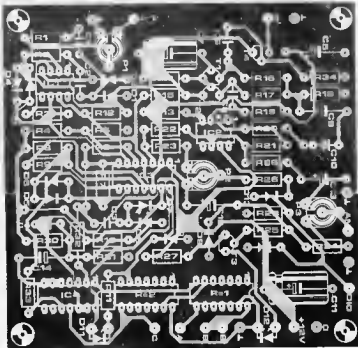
The printed-circuit board is double-sided, and the component layout side takes the form of an earth-plane.
